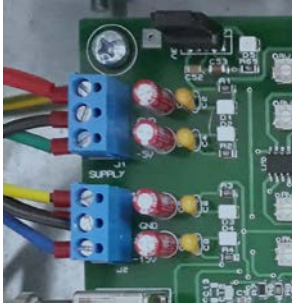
Supply Connectors on the Buck Converter Control PCB
